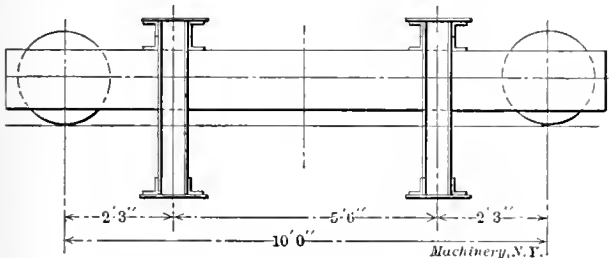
Arrangement of End Carriages of Crane shown in Outline in Fig. 44
